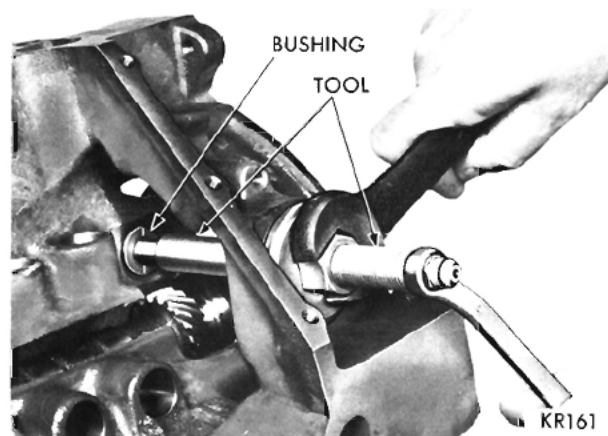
Burnishing Distributor Drive Shaft Bushing Using Tool C-3053
